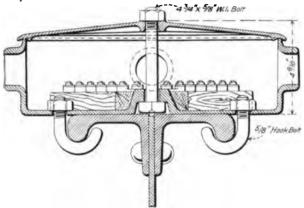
Insulated Switch Rod and Details. Pennsylvania Railroad.
